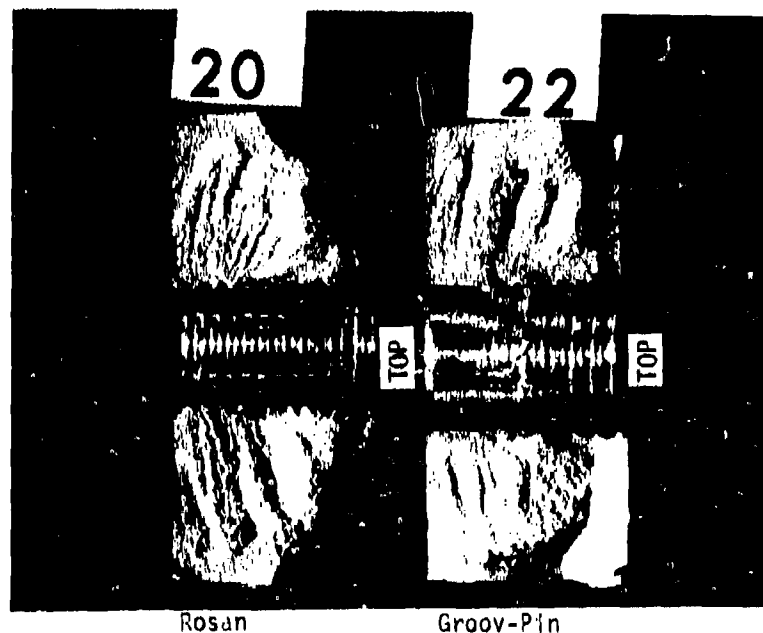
Close-up of Fatigue Failure of Specimens with Rosan and Groov-Pin 1/4-28 Size Insert. Inserts Installed by Manufacture. Torqued Bolts in Inserts During Tests.
